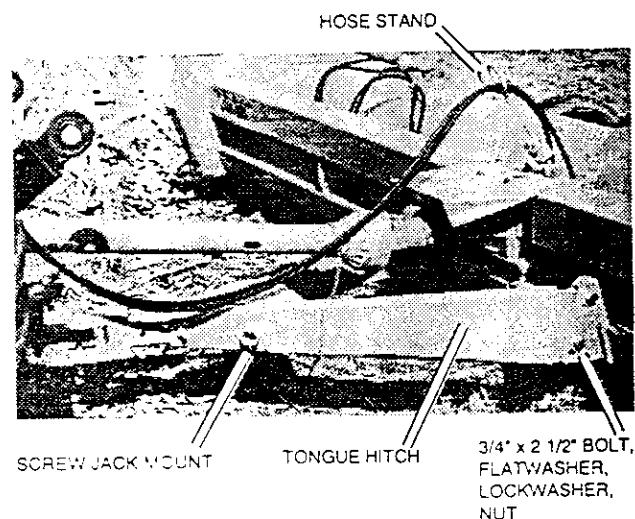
Hitch Assembly of Pull-Type Unit showing the Bolt-On Tongue.
